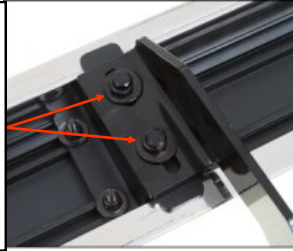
Slide & line up the U-Slider with the installed mounting brackets along bottom channel
